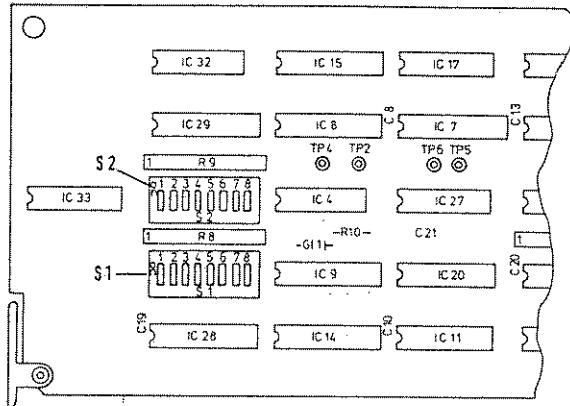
Part of component side of the CRC p.c. board showing switches S1 and S2
